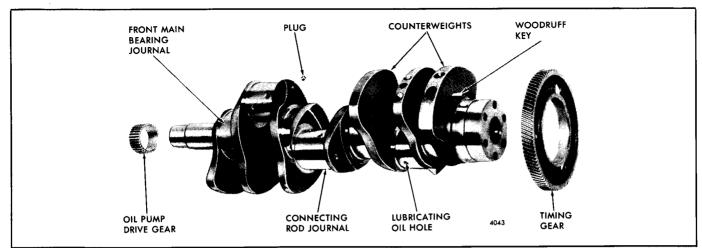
Crankshaft Details and Relative Location of Parts (6V Crankshaft Shown)
